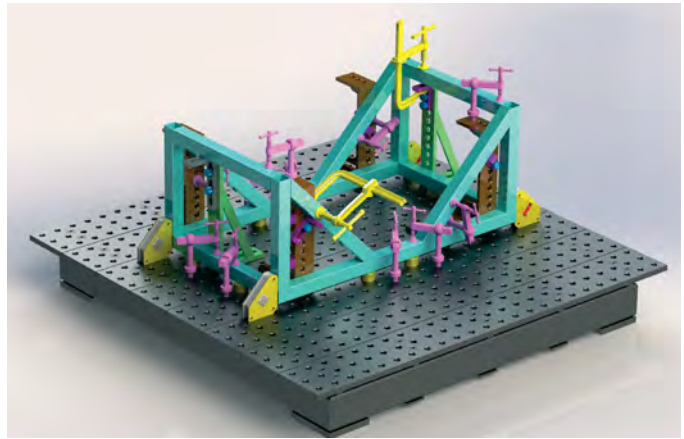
The SolidWorks® CAD software enables users to rapidly visualize, analyze, and verify fixture designs in a 3D environment.
